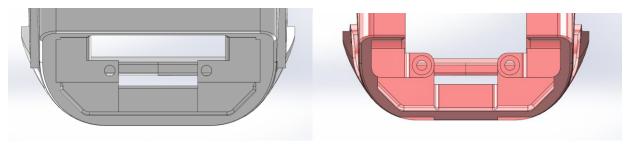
Failure of previous design (left) to maximize motor mounting peg material on bicep with redesigned part (right)
